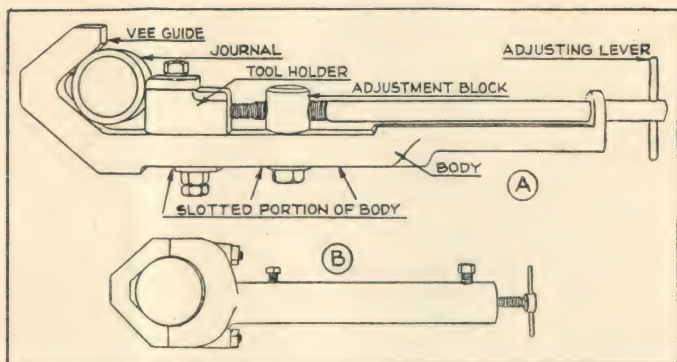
THE ARNOTT CRANKPIN TOOLS
